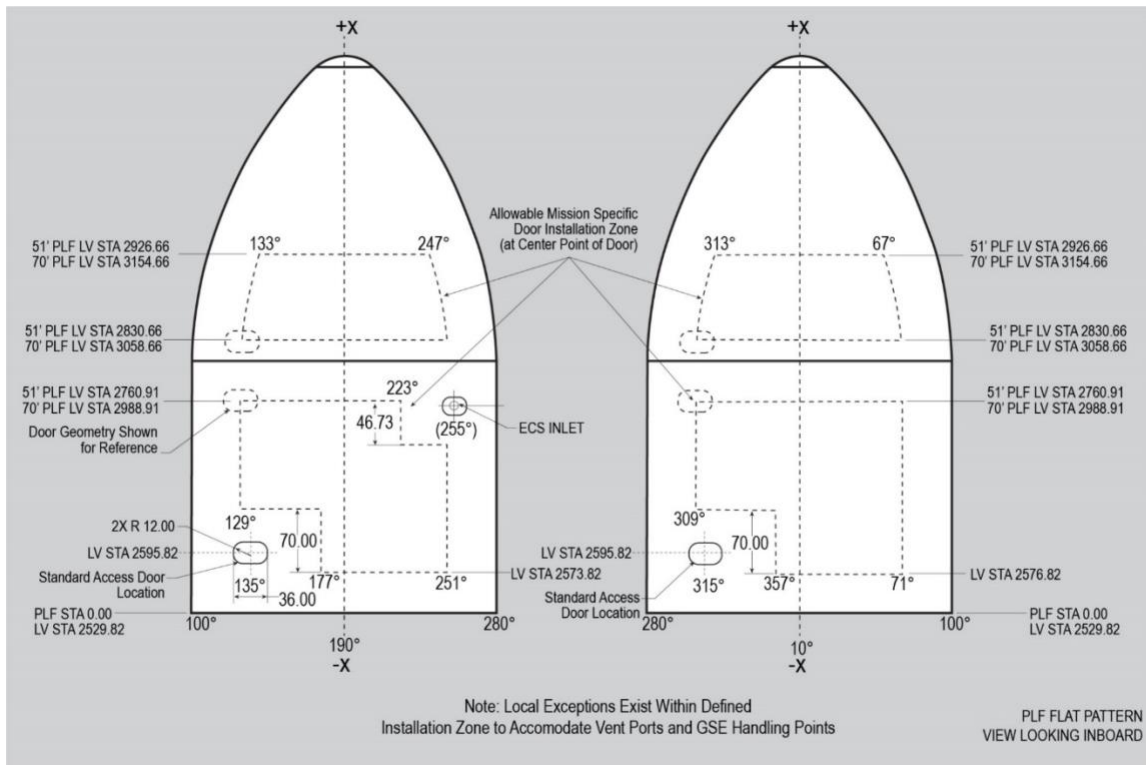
Vulcan Centaur Access Door Locations
